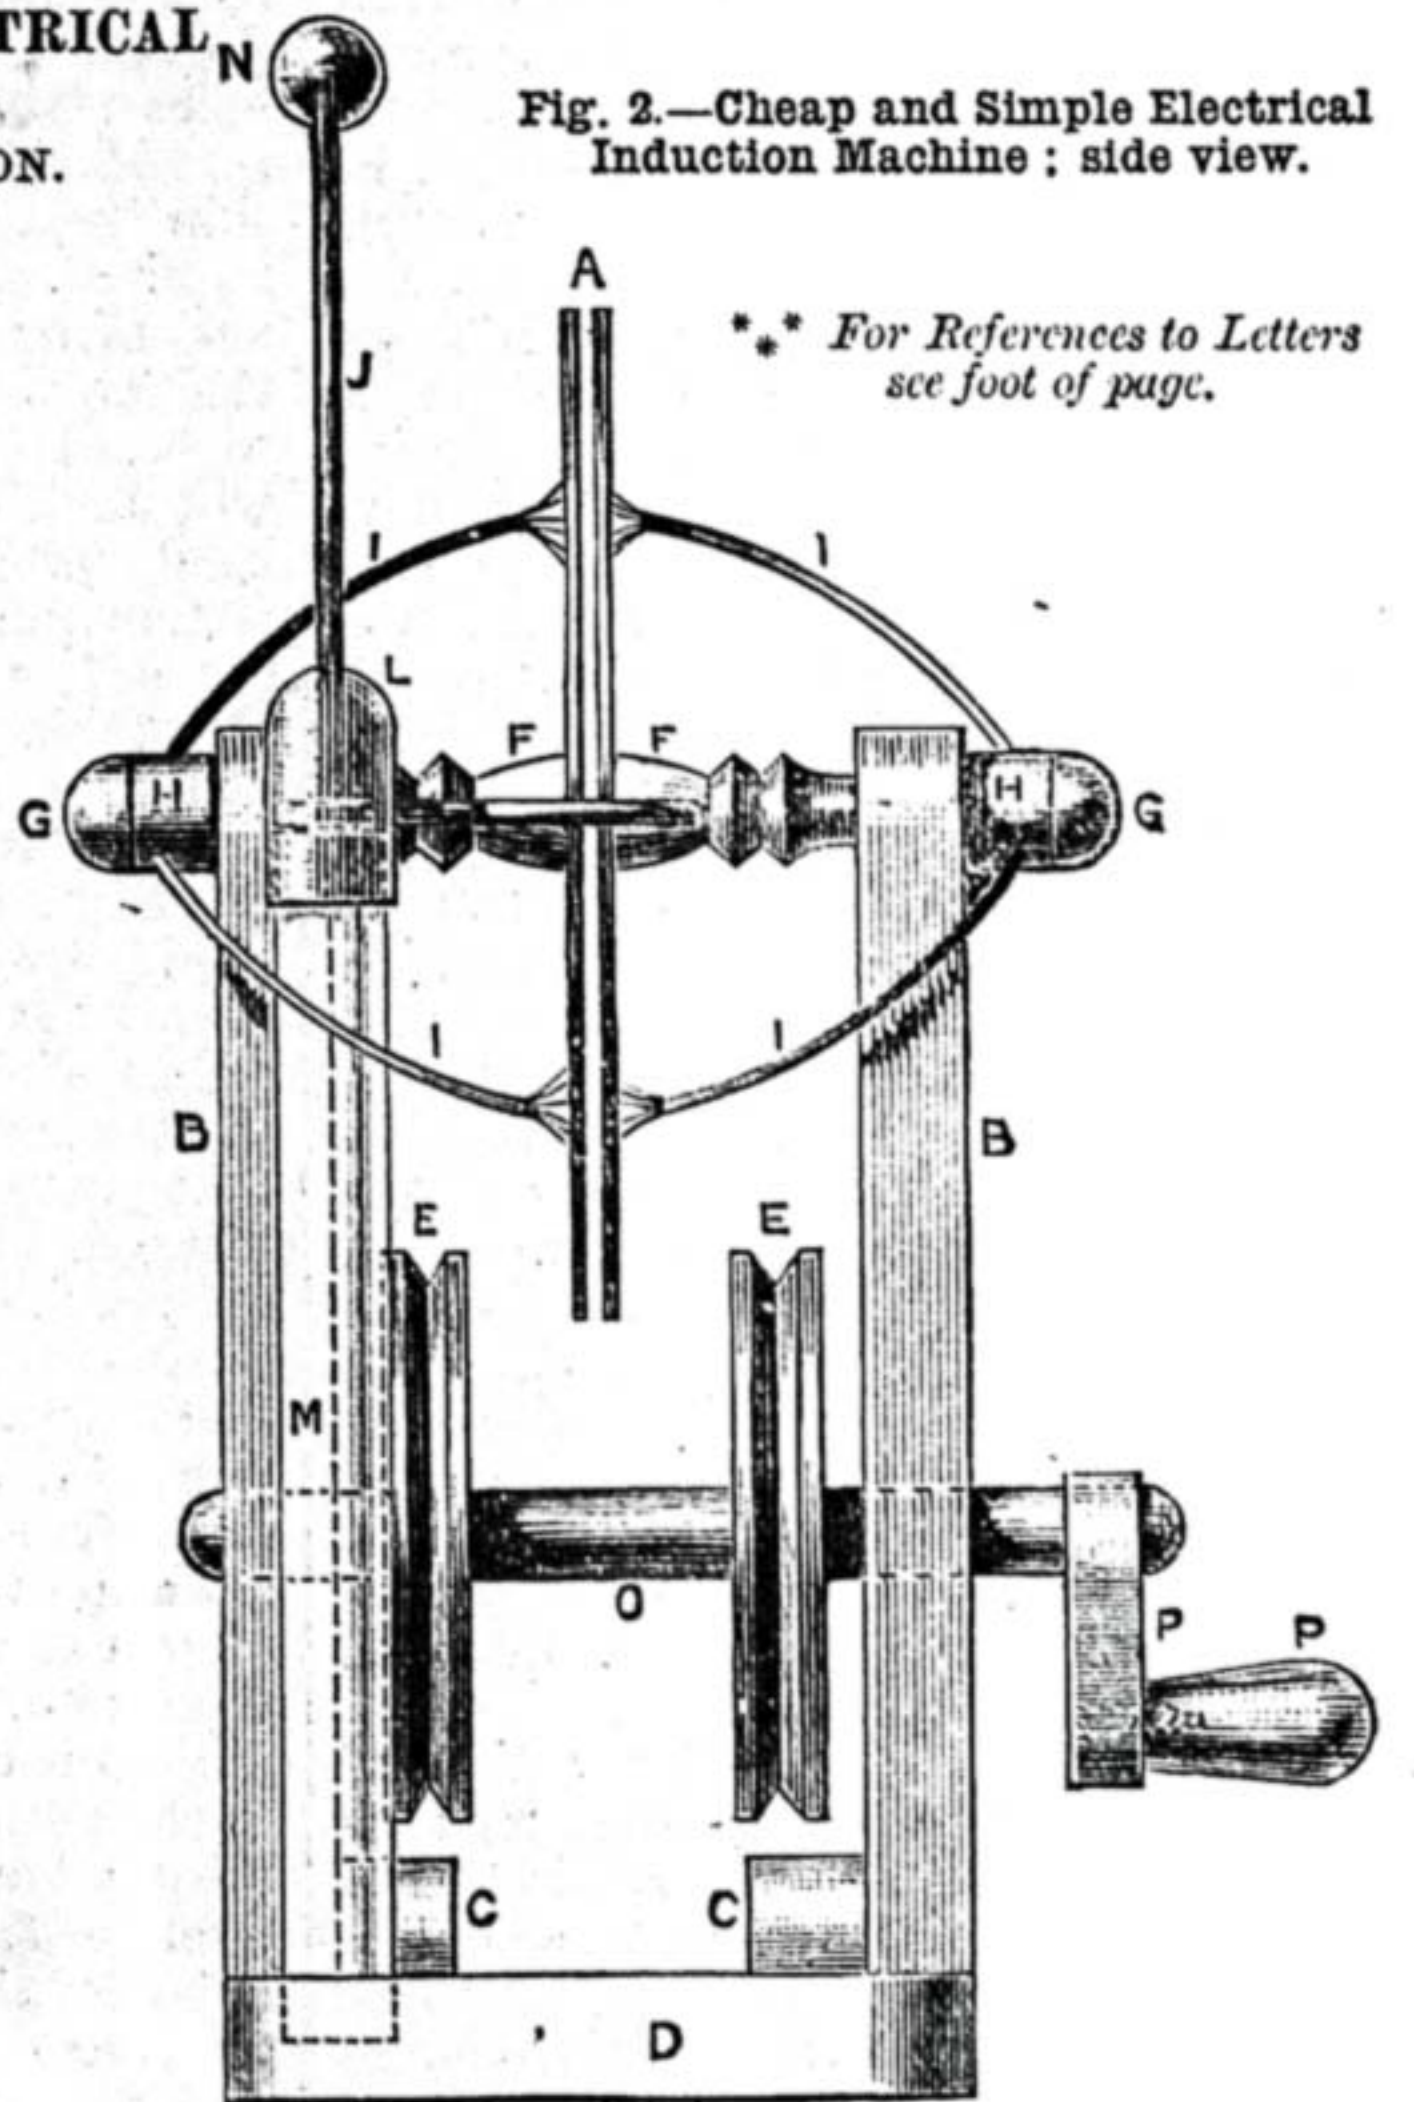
Cheap and Simple Electrical Induction Machine; side view.
